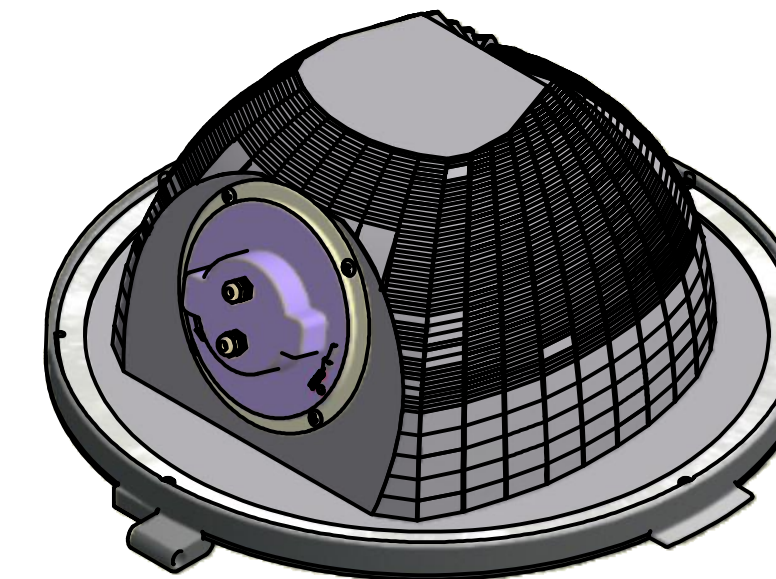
SOCKET HOLDER ASSEMBLY SEALED ROOF OPTIC
